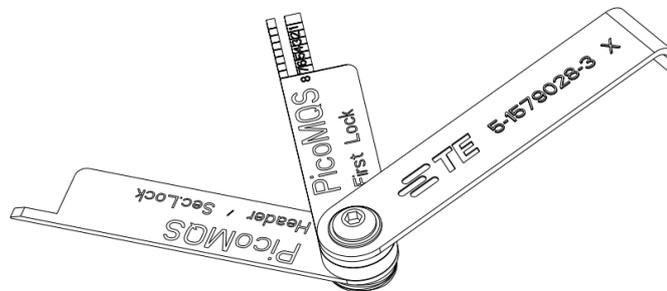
/ Abb. 8 Extractiontool / Entriegelungswerkzeug
